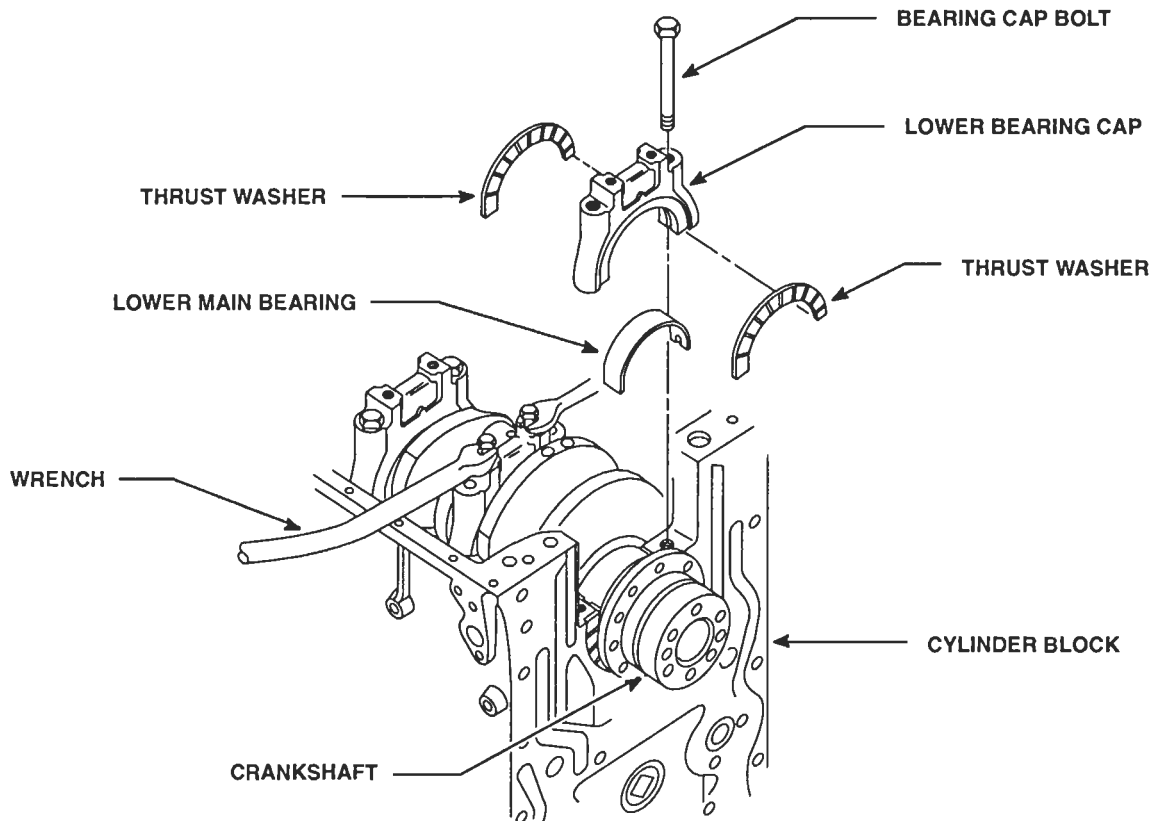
Main Bearing Caps, Bearing Shells and Crankshaft Thrust Washers
